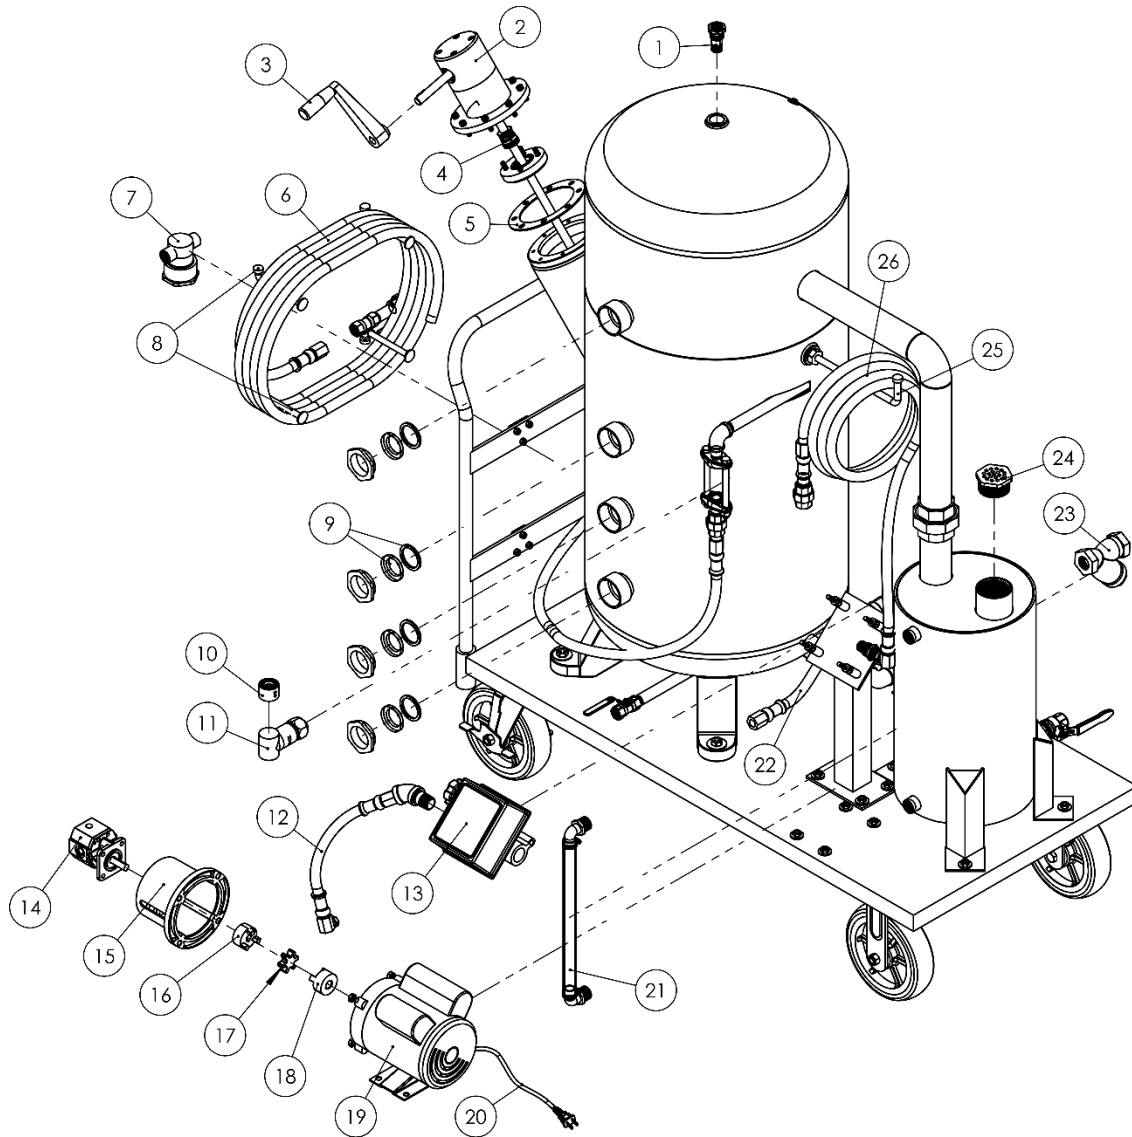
Oil Minion Replacement Parts & Assemblies.
